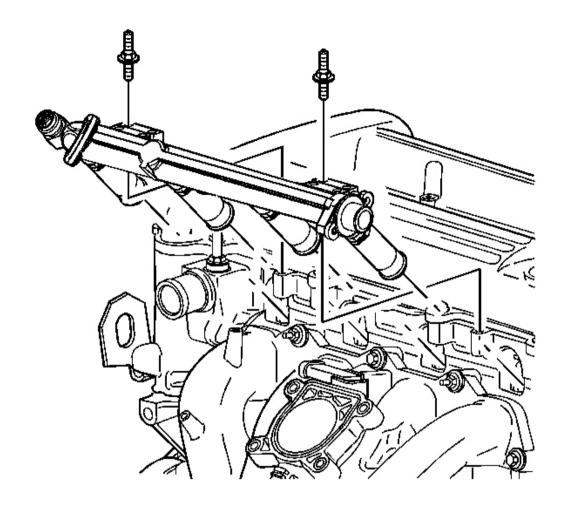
View Of Fuel Rail Assembly Attachment Bolts Courtesy of GENERAL MOTORS CORP.
